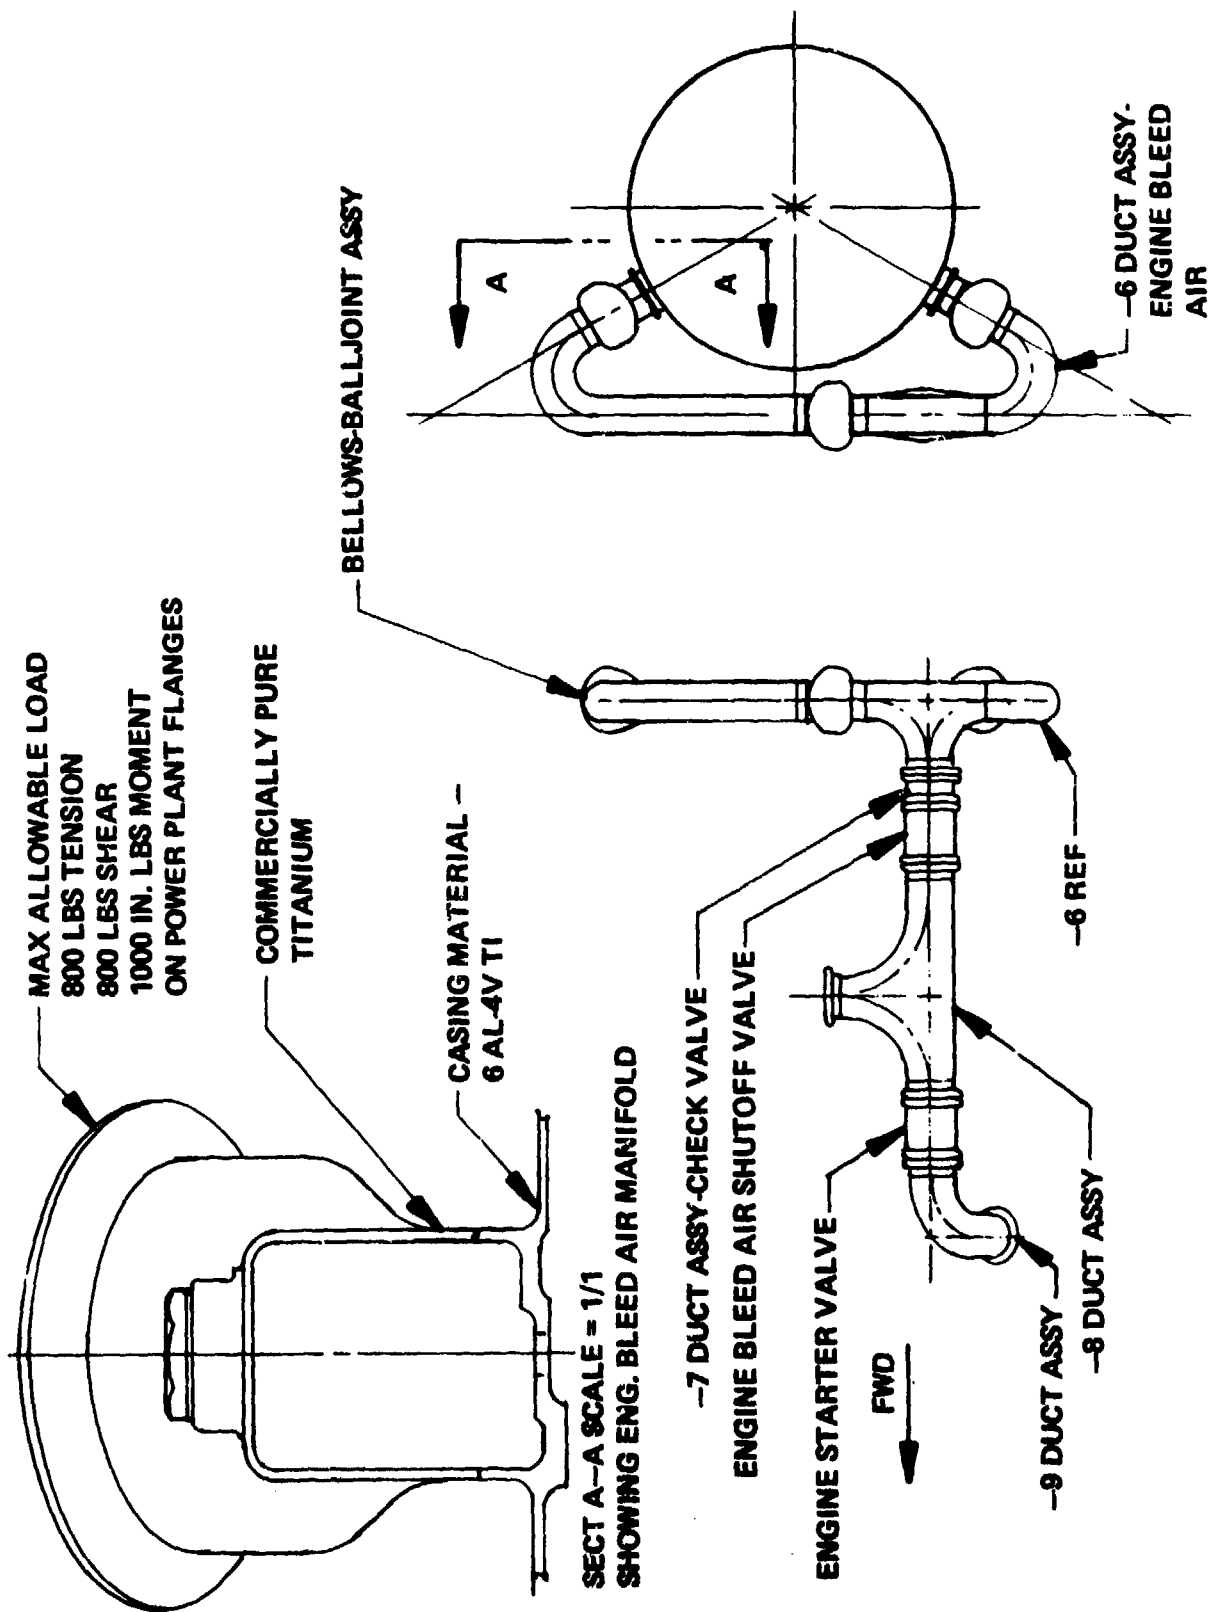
Engine bleed/start manifold with bellows-balljoint assembly.
